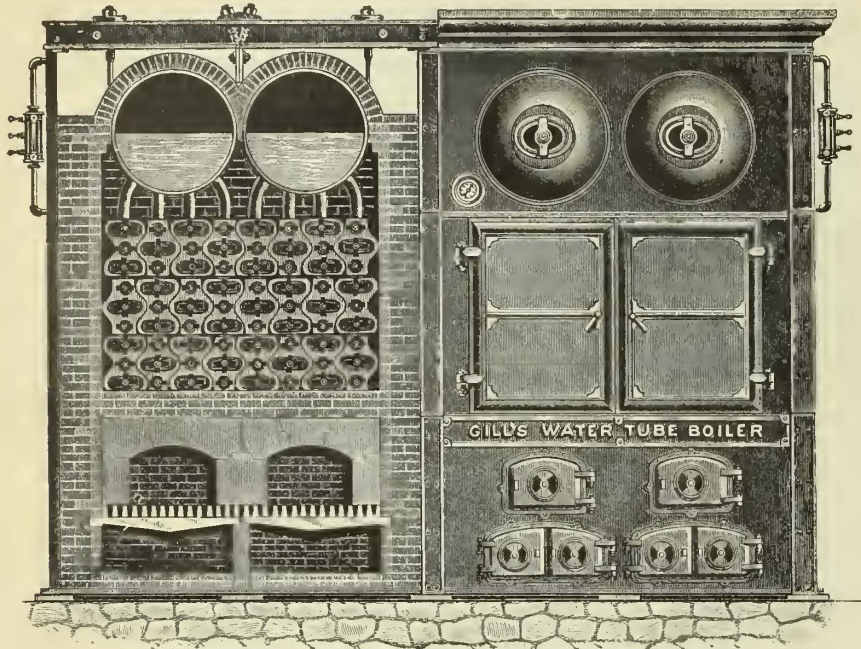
END VIEW—SAFETY WATER TUBE BOILER.
